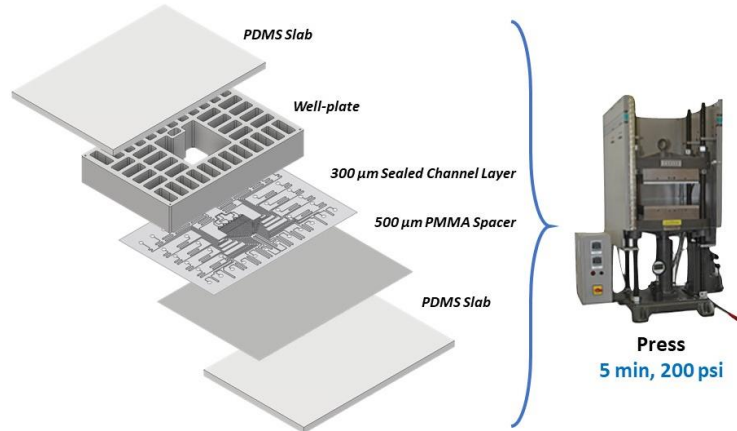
Assembly of the OncoSlice device in a hydraulic press
